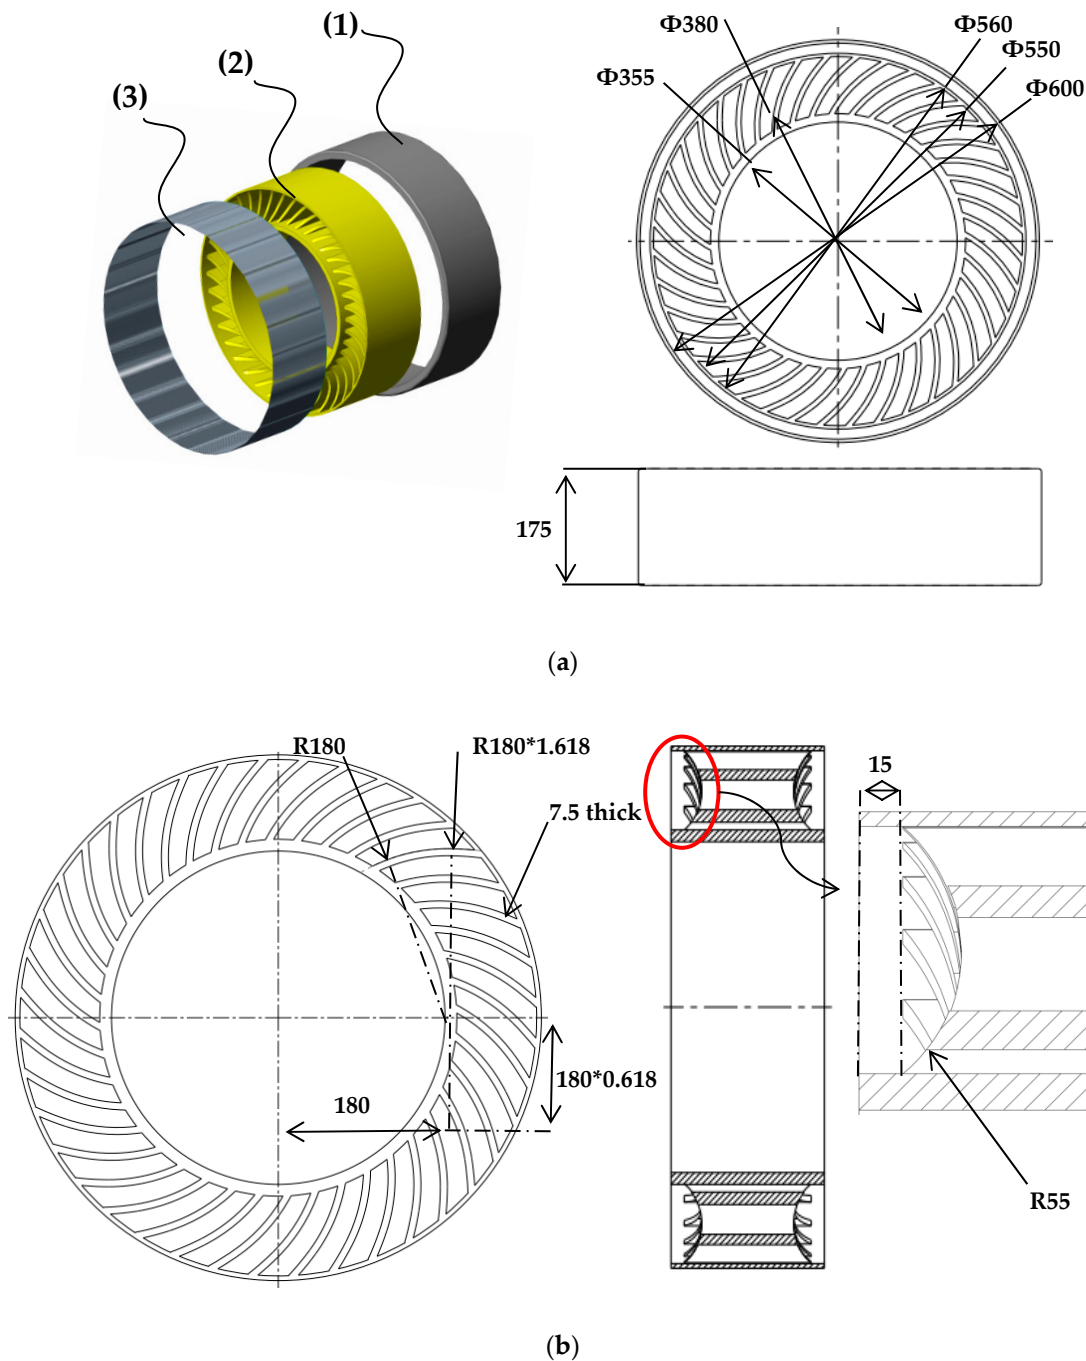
The geometry of the NPT: (a) geometric dimensions of the NPT; (b) geometric dimensions of the spoke.
